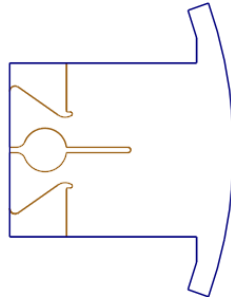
Sketch of the shape the laser cut tooth in blue, and the shape to be cut with electric discharge machining in bronze (with the final design of the dovetail tenon joint).
